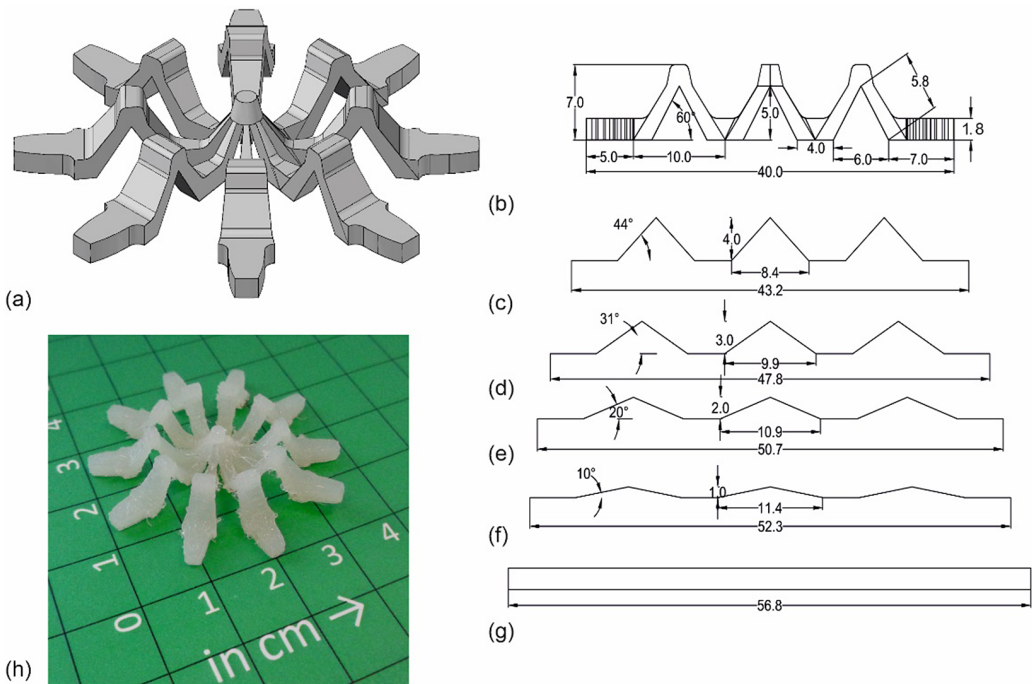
Technical drawings and an additively manufactured demonstrator for a simplified programmable gear-like object in its (a) isometric view, (b) front view including the dimensions of the original shape, (c–g) the potential shape modifications due to stepwise loading with regard to individual displacements, and (h) after additive manufacturing via FFF. In panels (b–g), the dimensions are provided in millimetres.
